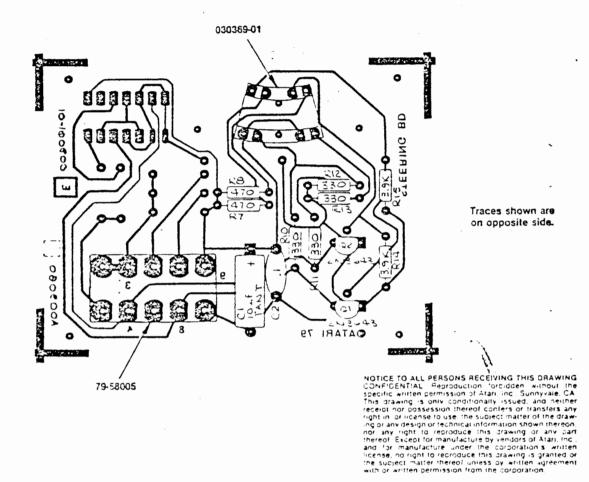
Steering Printed-Circuit Board Assembly A009060-02 C
